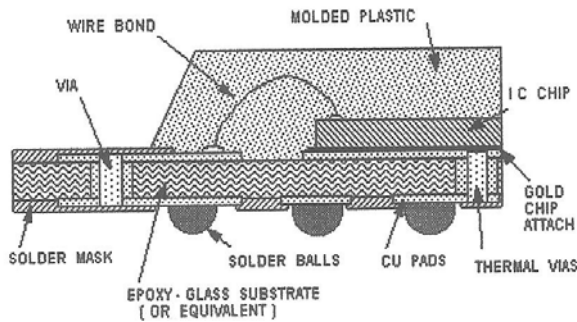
Cross section of BGA package showing interfaces between dissimilar materials (after [15]).
